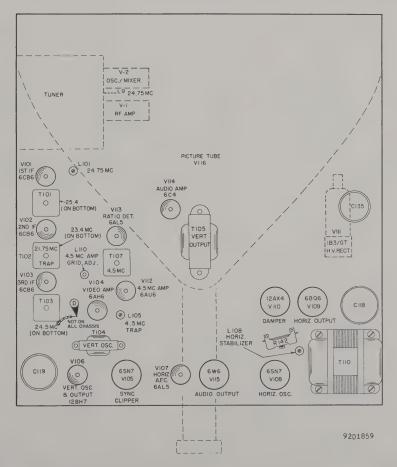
AB. Top View Alignment Locations for Chassis J & T1200D
